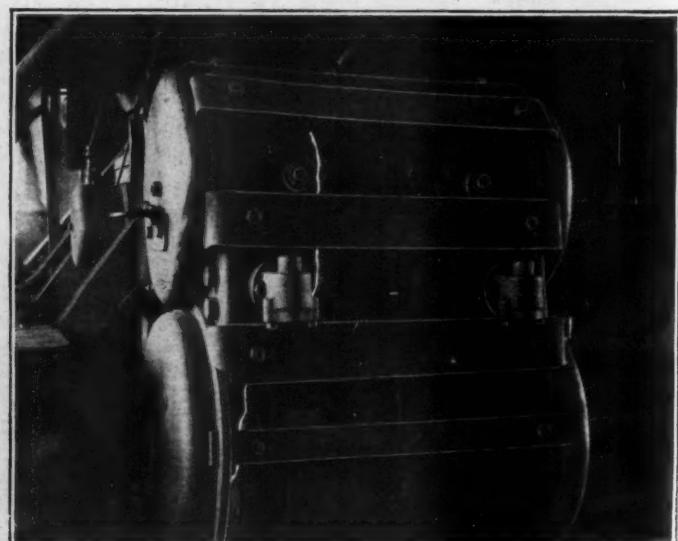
CYLINDERS AFTER BRACES HAVE CLOSED UP CRACK.
